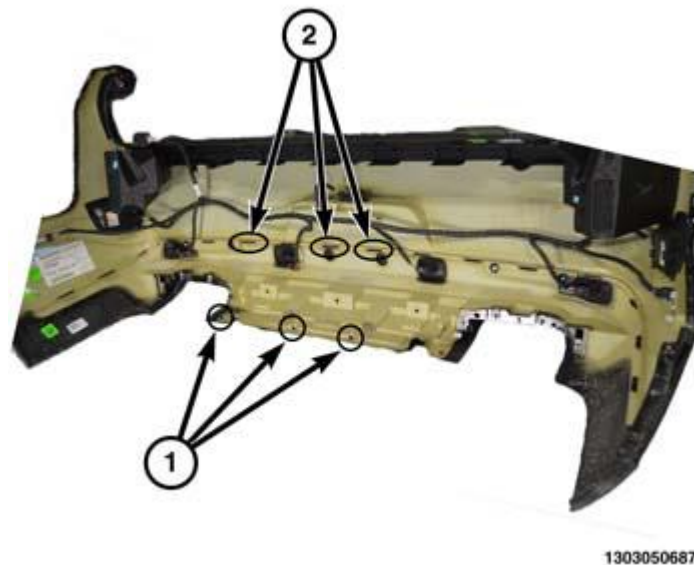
Lower Fascia Push-Pin Fasteners & Upper Clips
